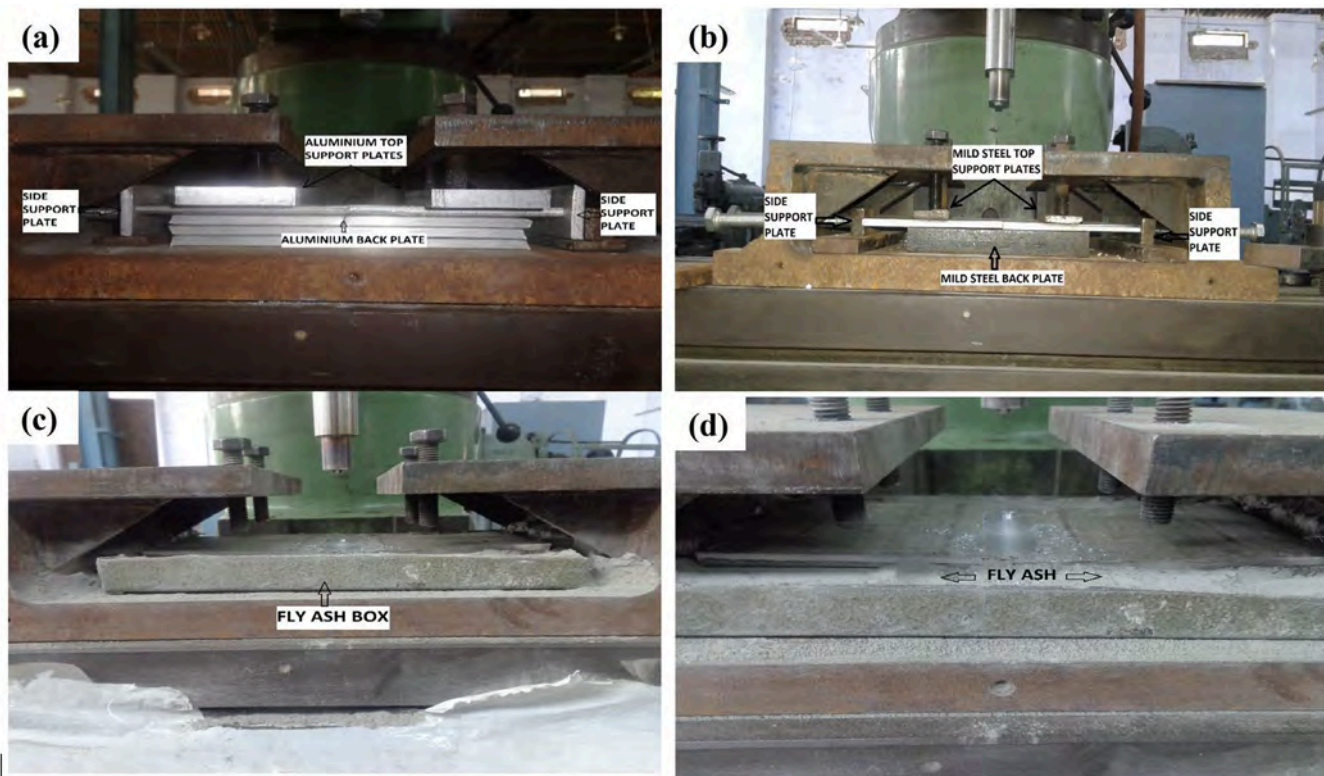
Backing conditions used in the present work: (a) aluminium backing condition setup, (b) mild-steel backing condition setup, (c) fly-ash backing condition showing the plate positioned over the fly-ash-filled steel box during welding,
